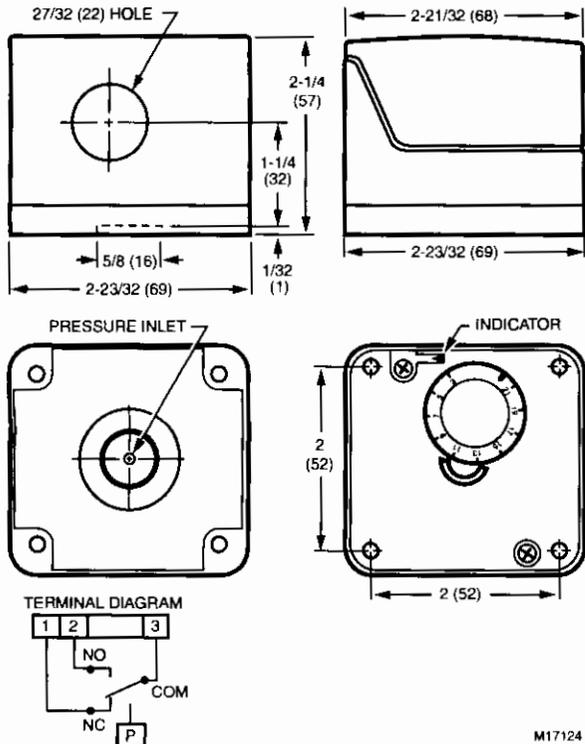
C6097 Flange Mount dimensions in in. (mm).
